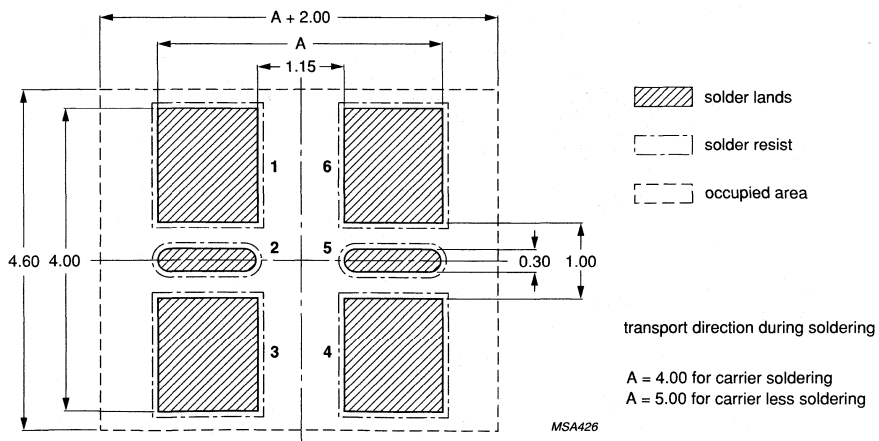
Wave soldering footprint for SC-88 (SOT363).
